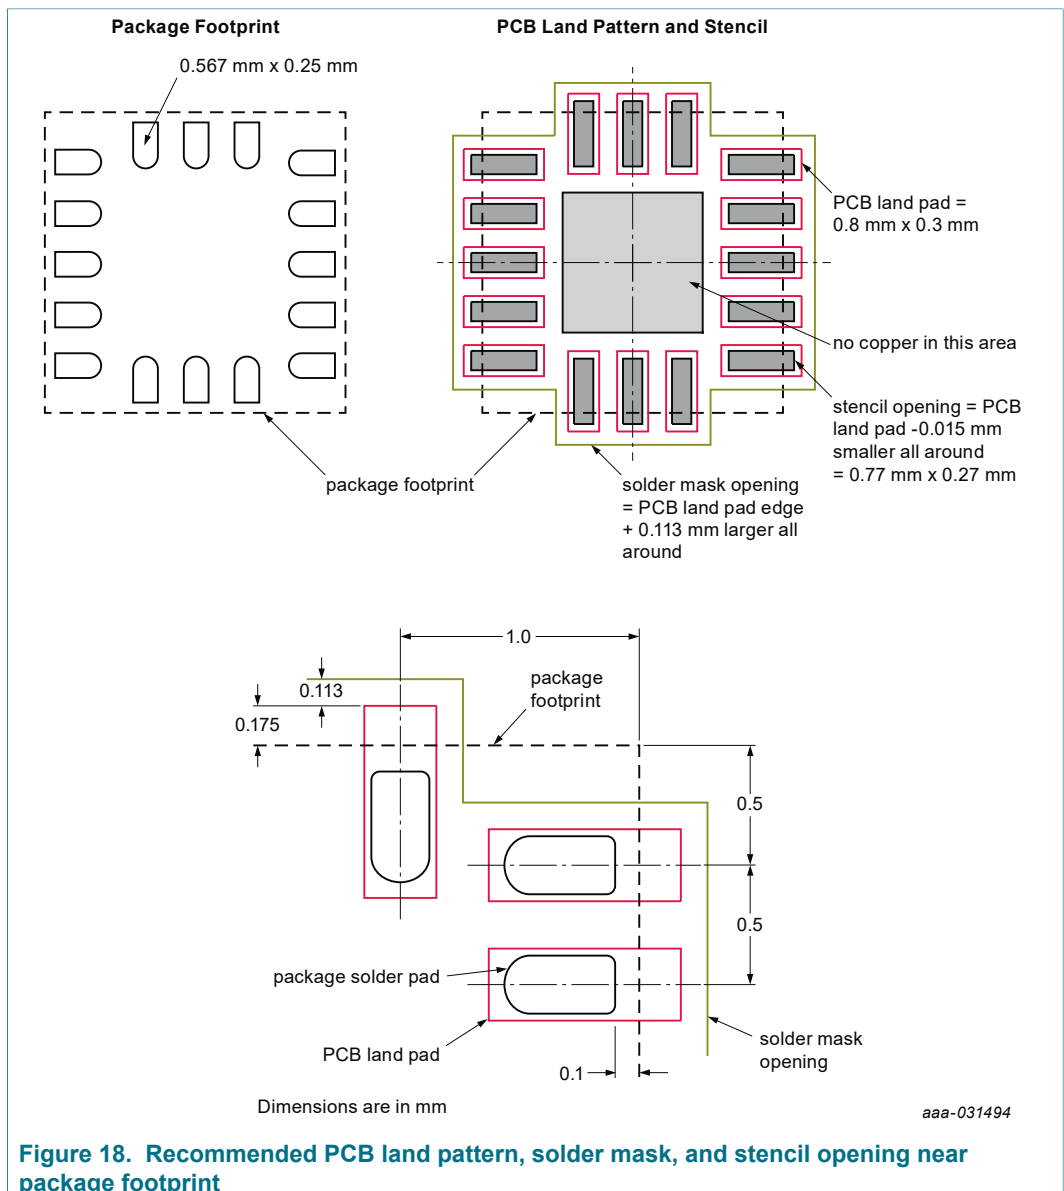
Recommended PCB land pattern, solder mask, and stencil opening near package footprint
